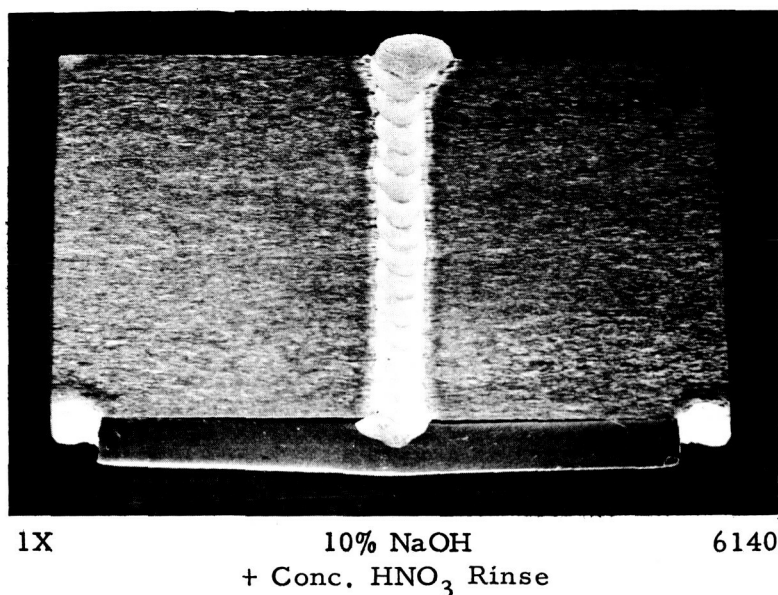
MACROSECTION OF A NARROW-GAP WELD DEPOSITED IN THE FLAT POSITION IN 2-INCH-THICK 2219 ALUMINUM ALLOY PLATE (Plate R-26)
